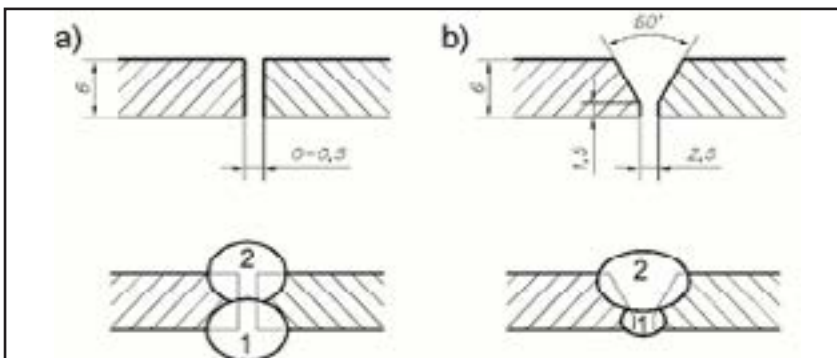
Pre-weld preparation of edges and the welding sequence
